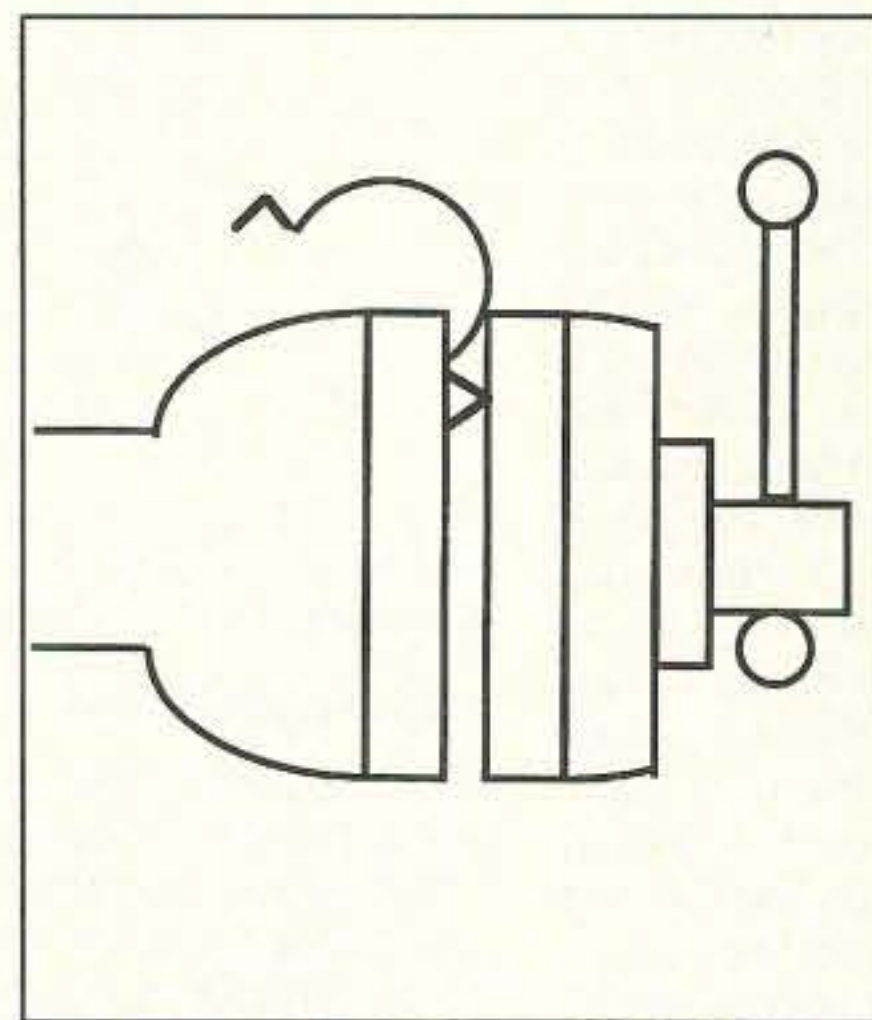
Using a vise to flatten the edges of a flagpole bracket to make the end half-ring a little larger so that the spring will fit in.
